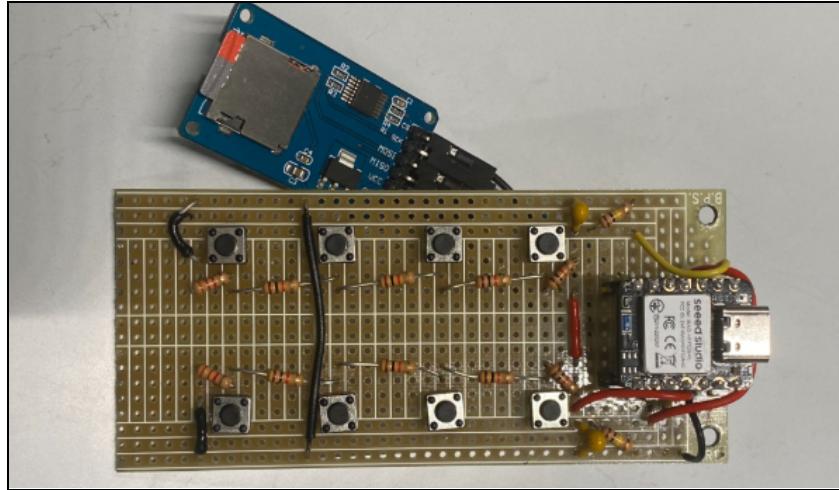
Assembled prototype showing the QT Py microcontroller mounted to the perfboard, the resistor-ladder button array, and the external microSD module connected for data logging.
